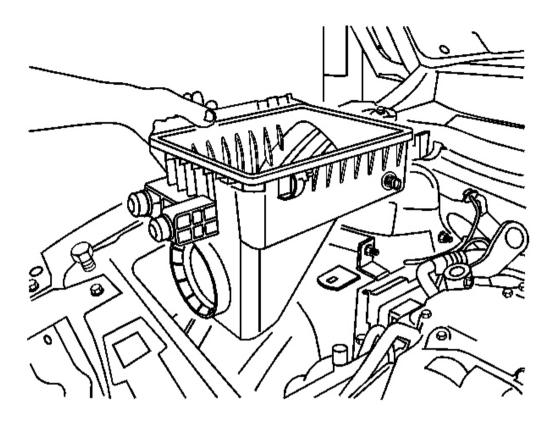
View Of Air Cleaner Assembly & Aligning Locking Pins Into The Front Panel Courtesy of GENERAL MOTORS CORP.
